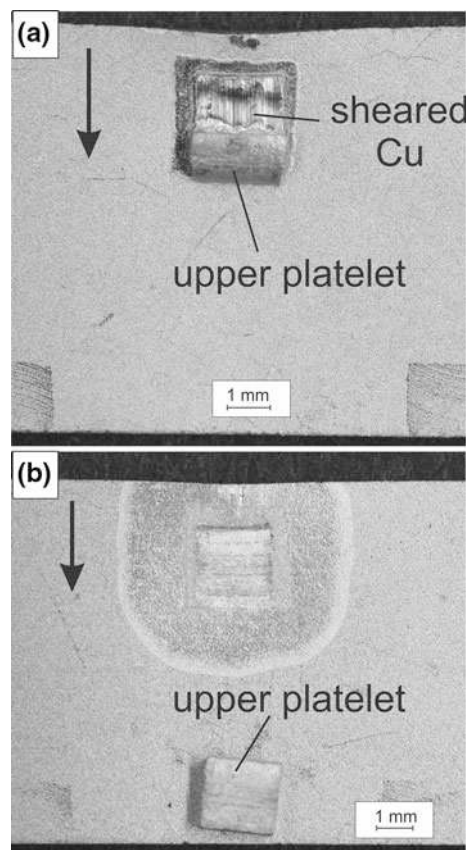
Solder specimens after shear testing: (a) Cu-Cu specimens and (b) Ni-Ni specimens.
